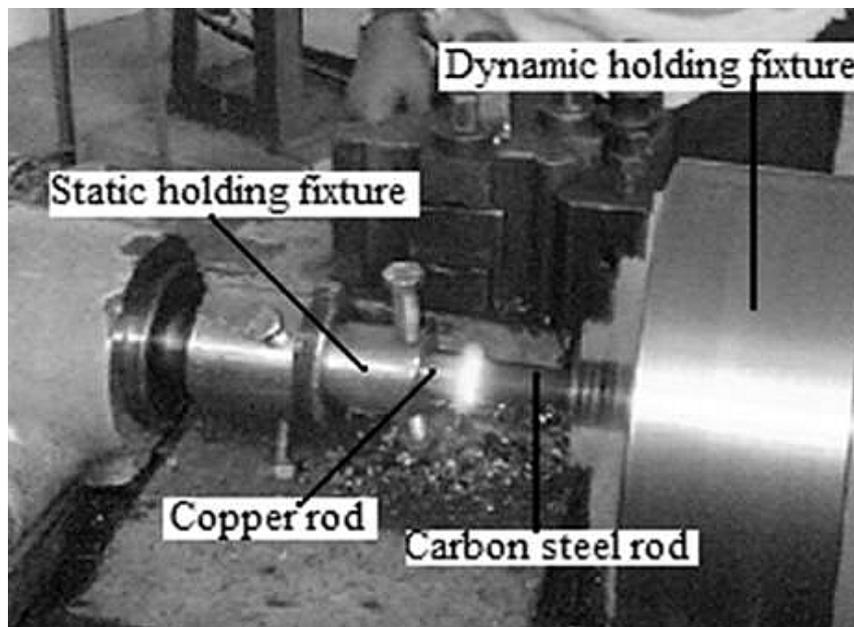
Friction welding of copper bar to carbon steel bar
